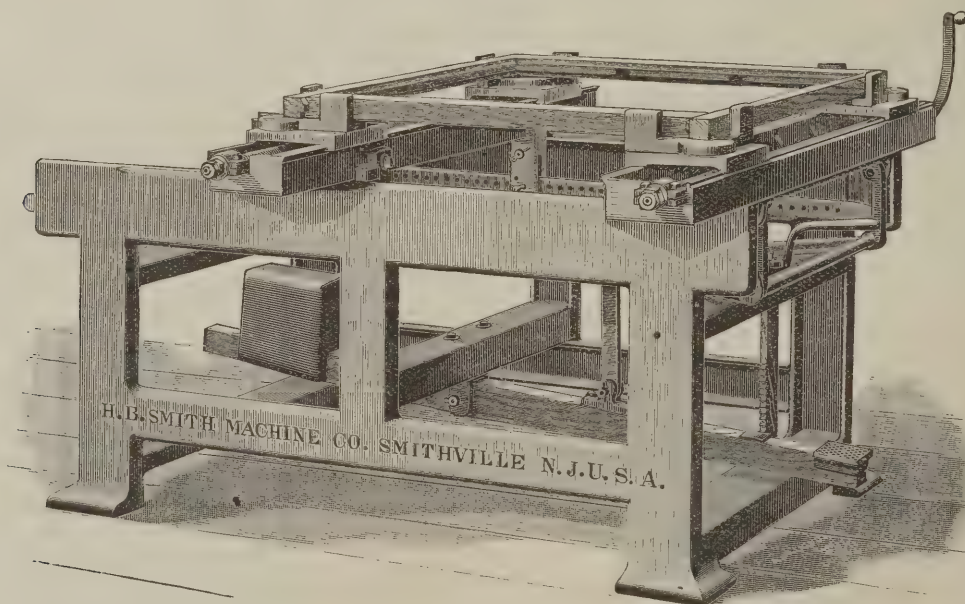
Improved Sash-Clamping Machine, Built by the H. B. Smith Machine Co., Smithville, N. J.
